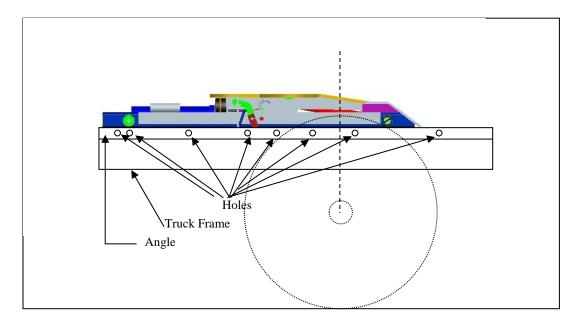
Fitting steel angle to tractor frame and hole locations for FW-30 & FW-45.
